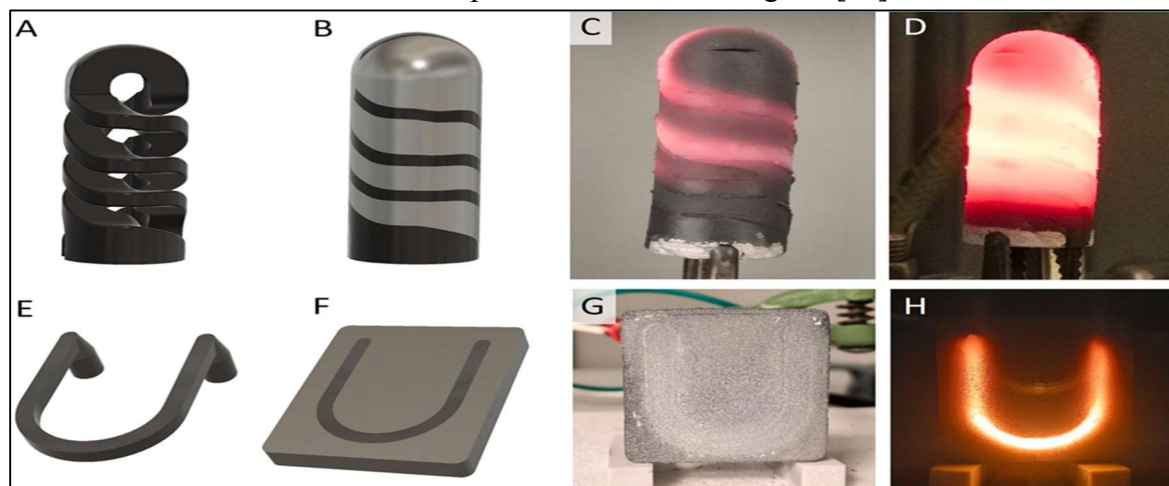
multi-component ceramic heating elements consisting of a MoSi₂/Al₂O₃/feldspar composite. A, E: CAD design of the heating element; B, F: Heating element combined with the supporting structure; C, D, G, H: Sintered parts under operation [53]
